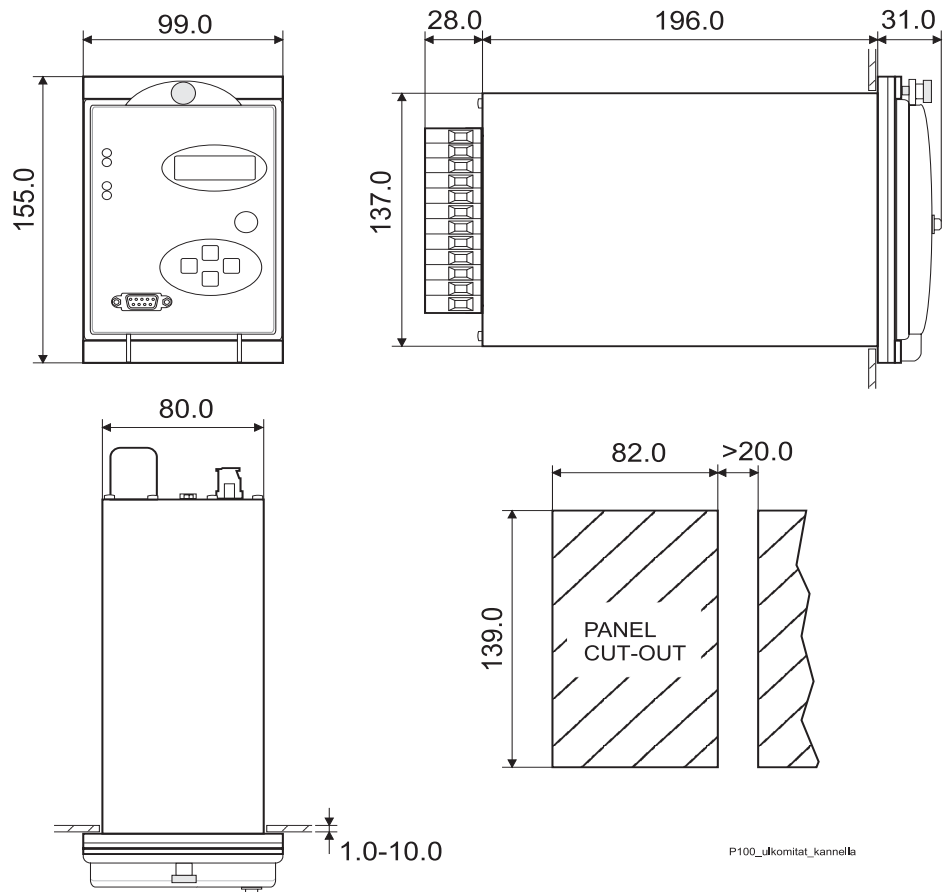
Dimensional drawing and panel cut-out dimensions
